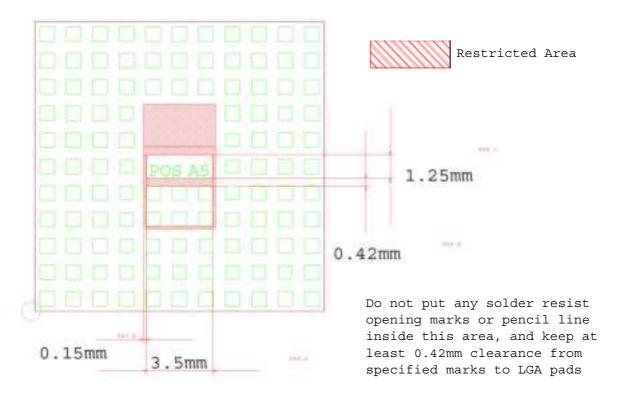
Dimensions of area for possible markings TX82-W, TX62-W-B and TX62-W-C (bottom view)
